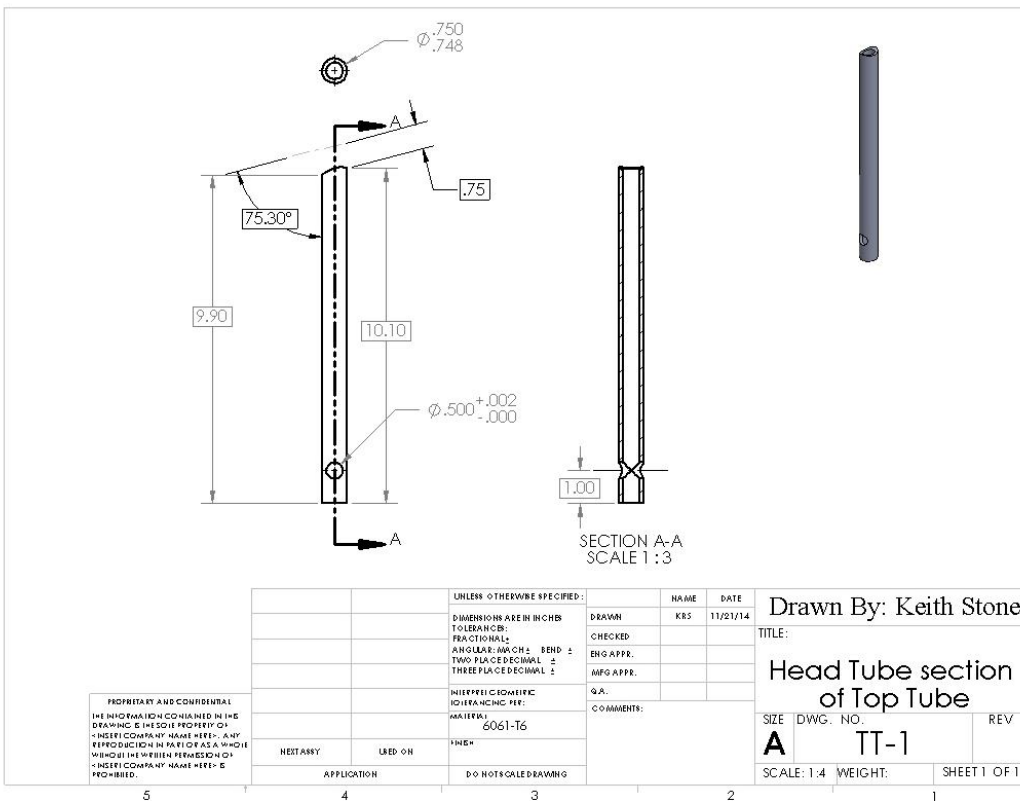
TT-1, Top tube section that is welded to head tube
